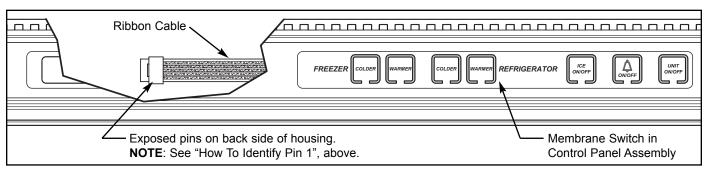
Control Panel Assy with Cut-Away View to Show Ribbon Cable (Model 632 Control Panel Shown)
